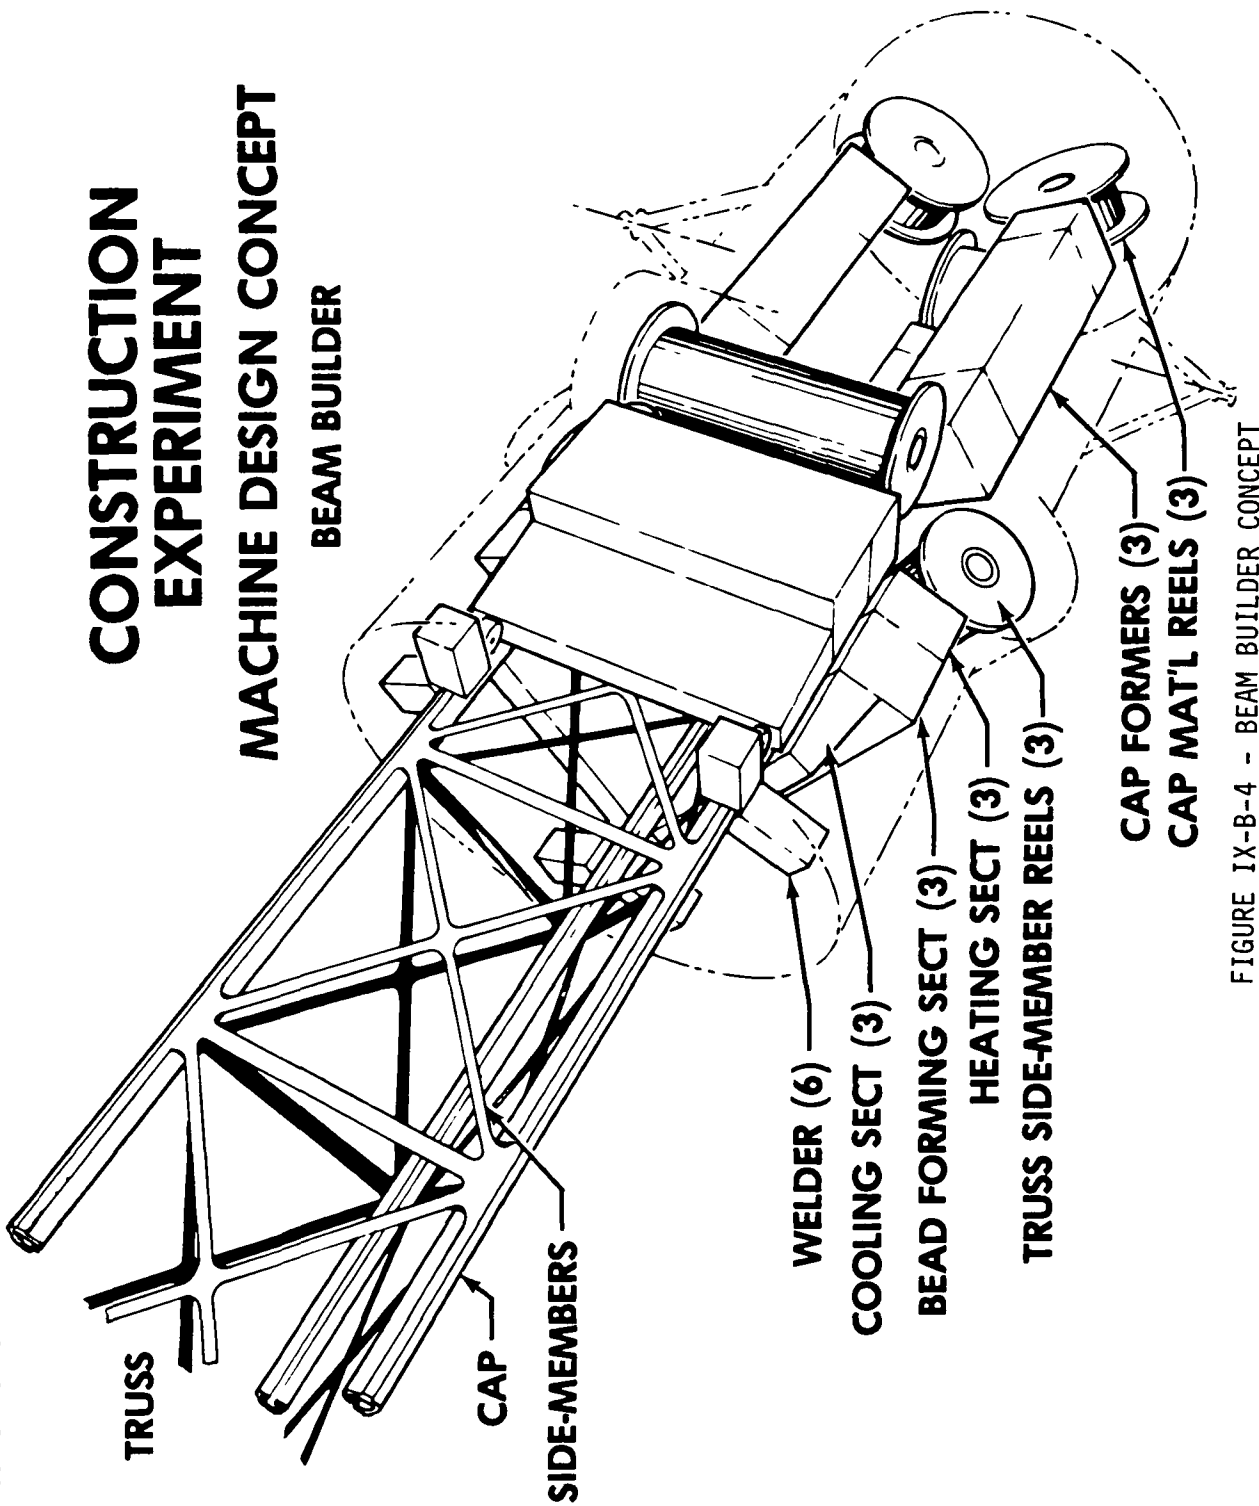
BEAM BUILDER CONCEPT
